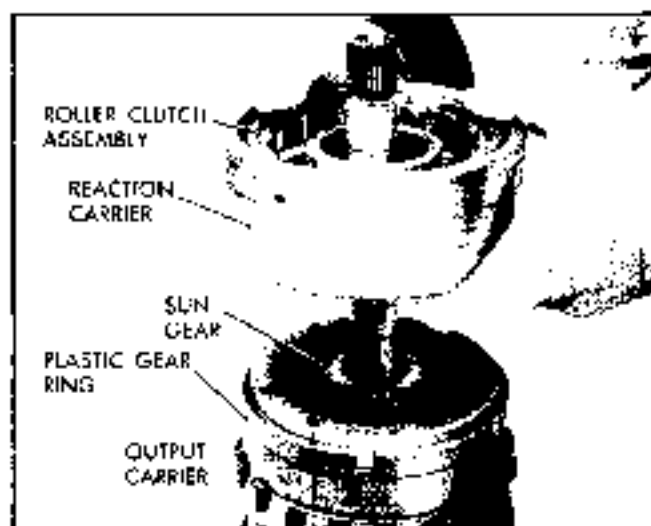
E-52 Removing Reaction Carrier and Roller Clutch from Output Carrier
